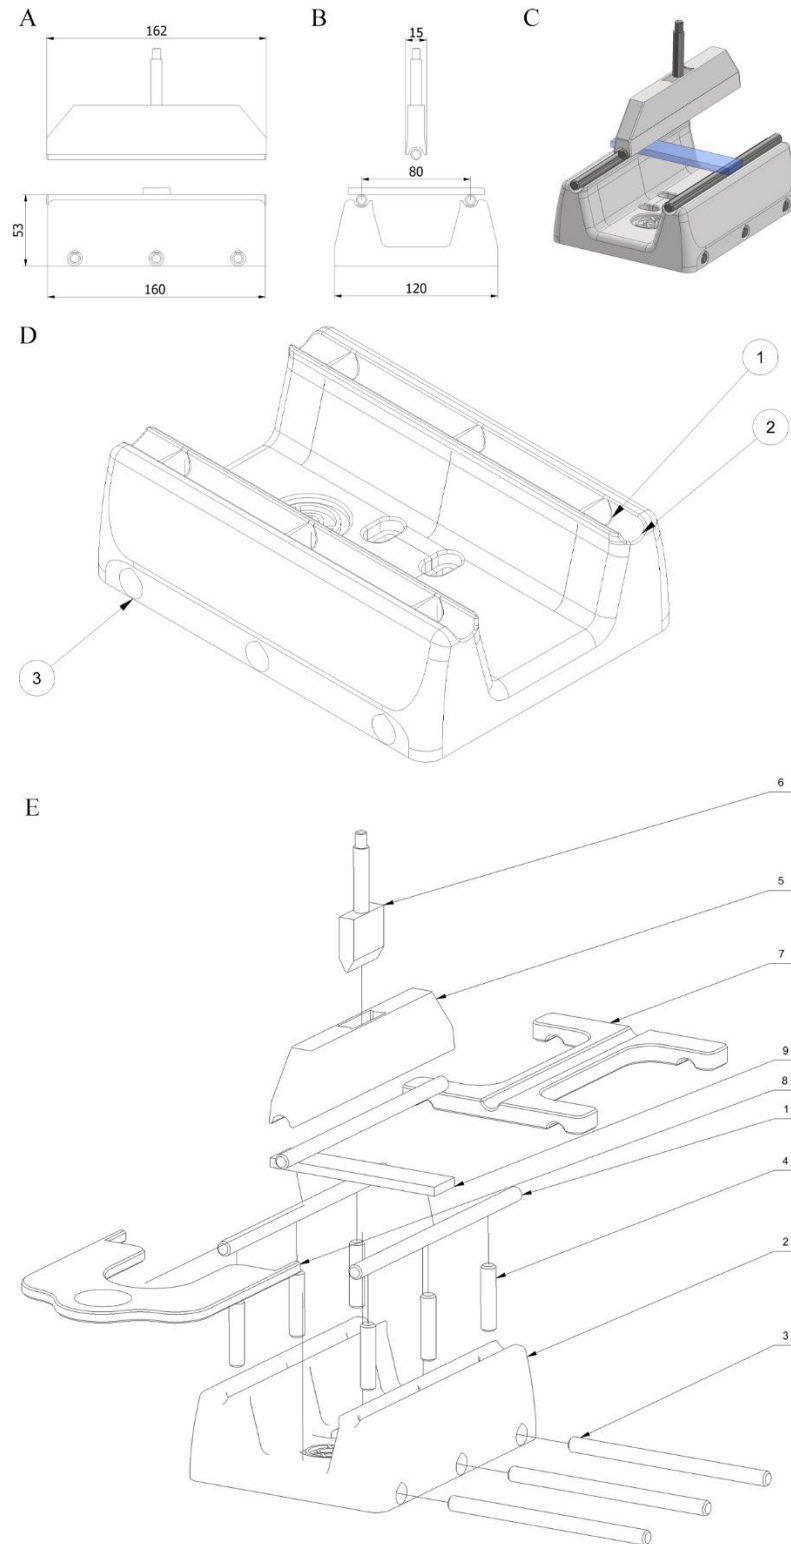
CAD model of the three-point bend test Shimadzu adapter solution. A) side view. B) front view. C) isometric view. D) isometric view of an adapter base. Numbers 1-3 indicate: holes in the Z-axis (1), support cut-outs in the Y-axis (2), and holes in the X-axis (3). E) Exploded view of Shimadzu tool assembly. Numbers depicted in the picture are explained in Table 2.3. Numbers 162, 15, 53, 160, 120, 80 in A-B indicate tool head length (mm), tool head width (mm), base height (mm), base length (mm), base width (mm), and span (mm), respectively.
